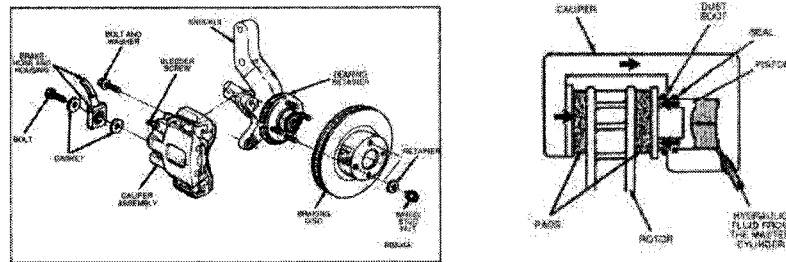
Assembly of disc brake (Carley and Mavrigian, 1998)
